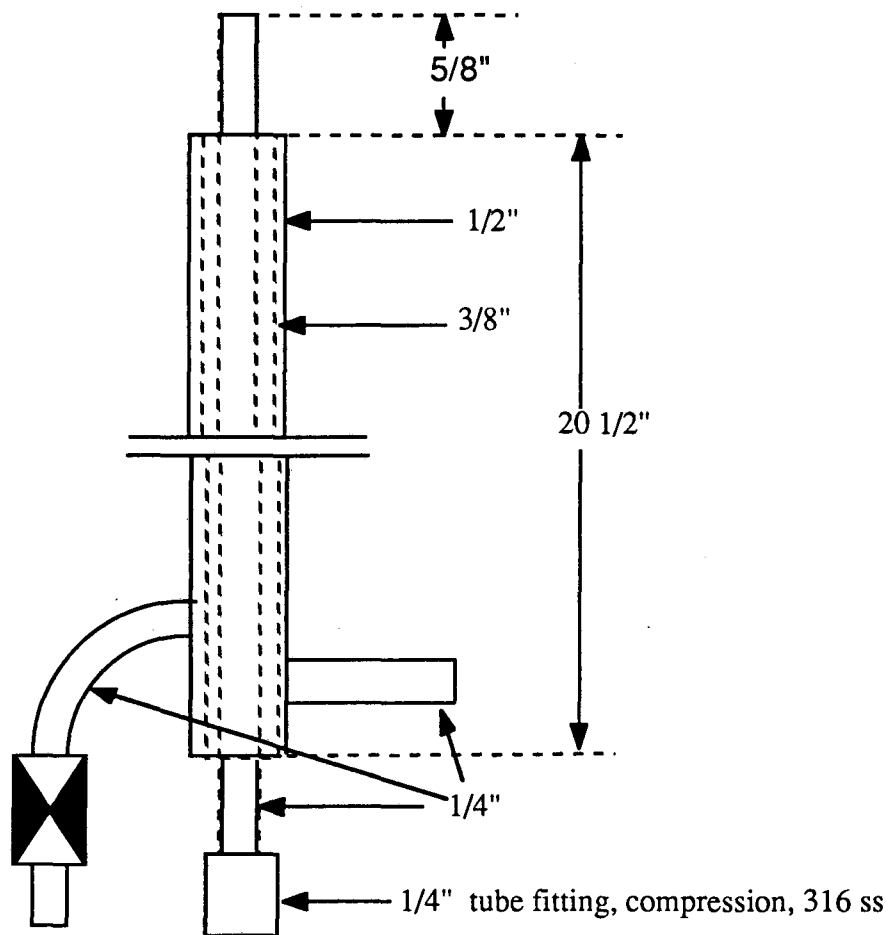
Diagram of the 310 stainless steel transfer line used in the VT probe. 310 stainless steel contains no carbon, making it much easier to anneal and remove magnetic impurities from welding and working with machine tools. Cold gas enters through  $1/4"$  tube in the center of the transfer line and flows out between the  $1/4"$  and  $3/8"$  tubes. The gap between the  $3/8"$  and  $1/2"$  tubes is maintained as a vacuum jacket.
